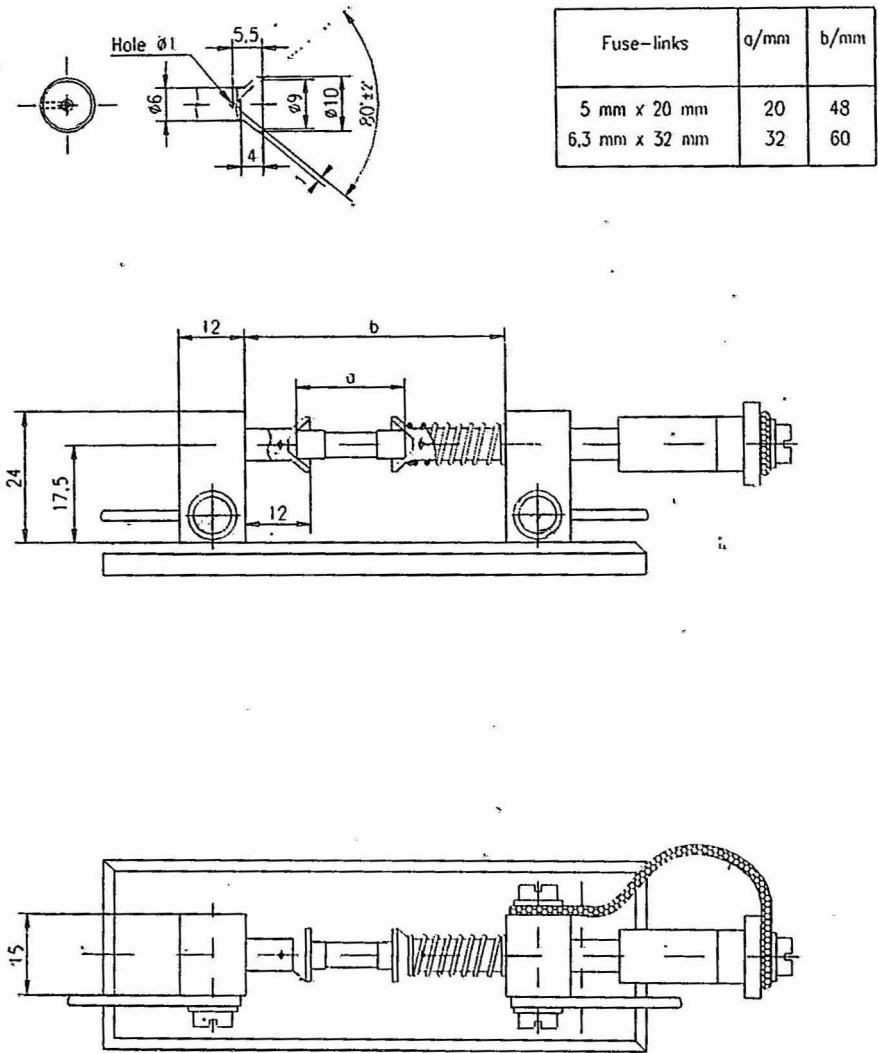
Test fuse-base for 5 mm x 20 mm and 6,3 mm x 32 mm fuse-links –
